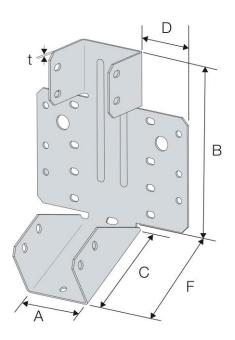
Dimensioned drawings of SPR type 38 / 50 /64 / 76
